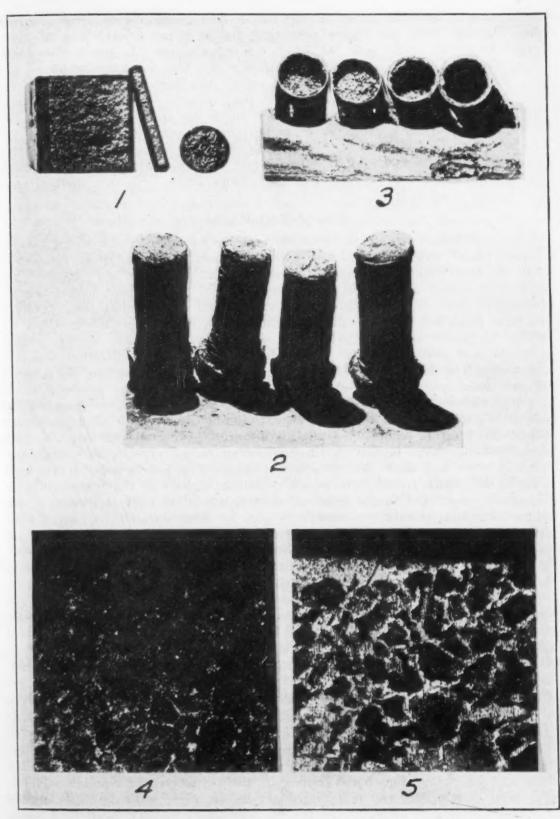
Photograph of etched fractures of pieces carburized together. Note that the depth of case is the same on each. Fig. 2—Photograph of pipes at the end of the carburizing heat, showing the condition of the seals. Fig. 3—Photograph of pipes after removing the clay, showing the shrinkage. Fig. 4—Photomicrograph of bar in the center of pipe No. 1 containing mixed compound. X 150. Fig. 5—Photomicrograph of bar in the top of pipe No. 1 containing mixed compound. X 150.
